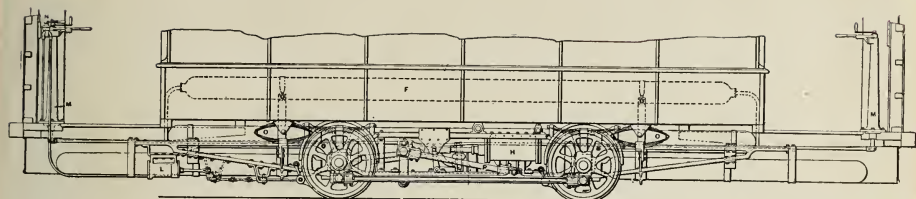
ELEVATION OF CAR, SHOWING DETAILS OF EQUIPMENT.
